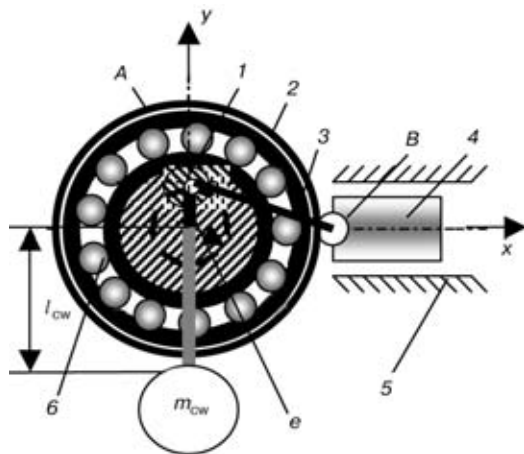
Mechanism of pulsed feed with one moving grip: 1 — eccentric axis; 2 — outer mandrel for fastening hinge *B* of the grip 4; 3 — outer race of bearing; 5 — guides; 6 — electric motor shaft (*A* — conditional hinge between crank and connecting rod)
